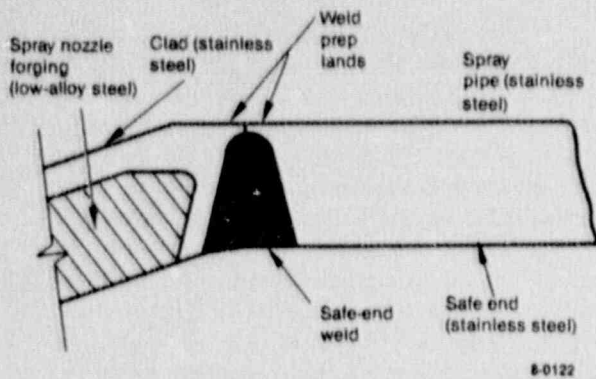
Cross section of pipe showing safe-end weld for Combustion Engineering spray nozzle. Assembly shown in Figure 3.10.
